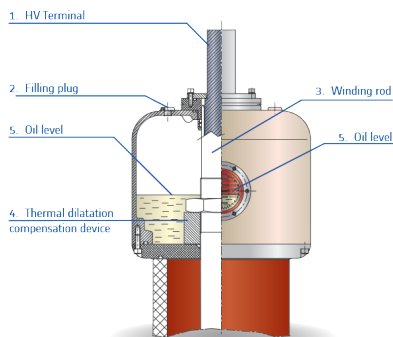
H4 head type (Bottom connection 245 kV 2500 A to 420 kV - 2000 A)
